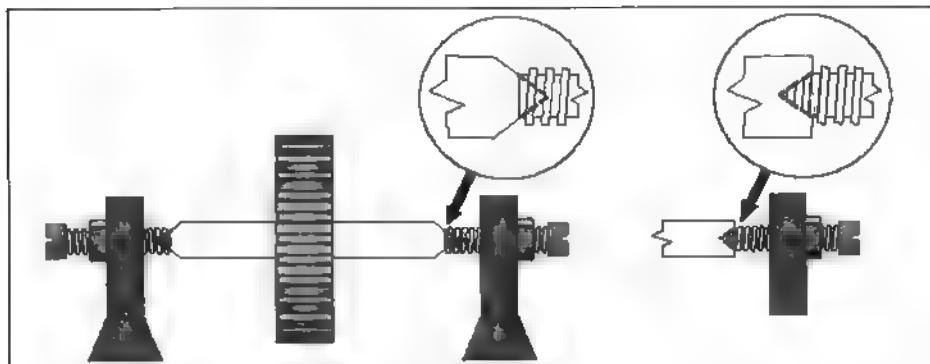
Left, a pair of coned-pivot bearings with male cones on the shaft; right, with a female cone within the end of the shaft.
